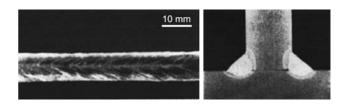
Regular bead appearance and smooth fusion with the base metal in horizontal fillet welding with DW-100.
